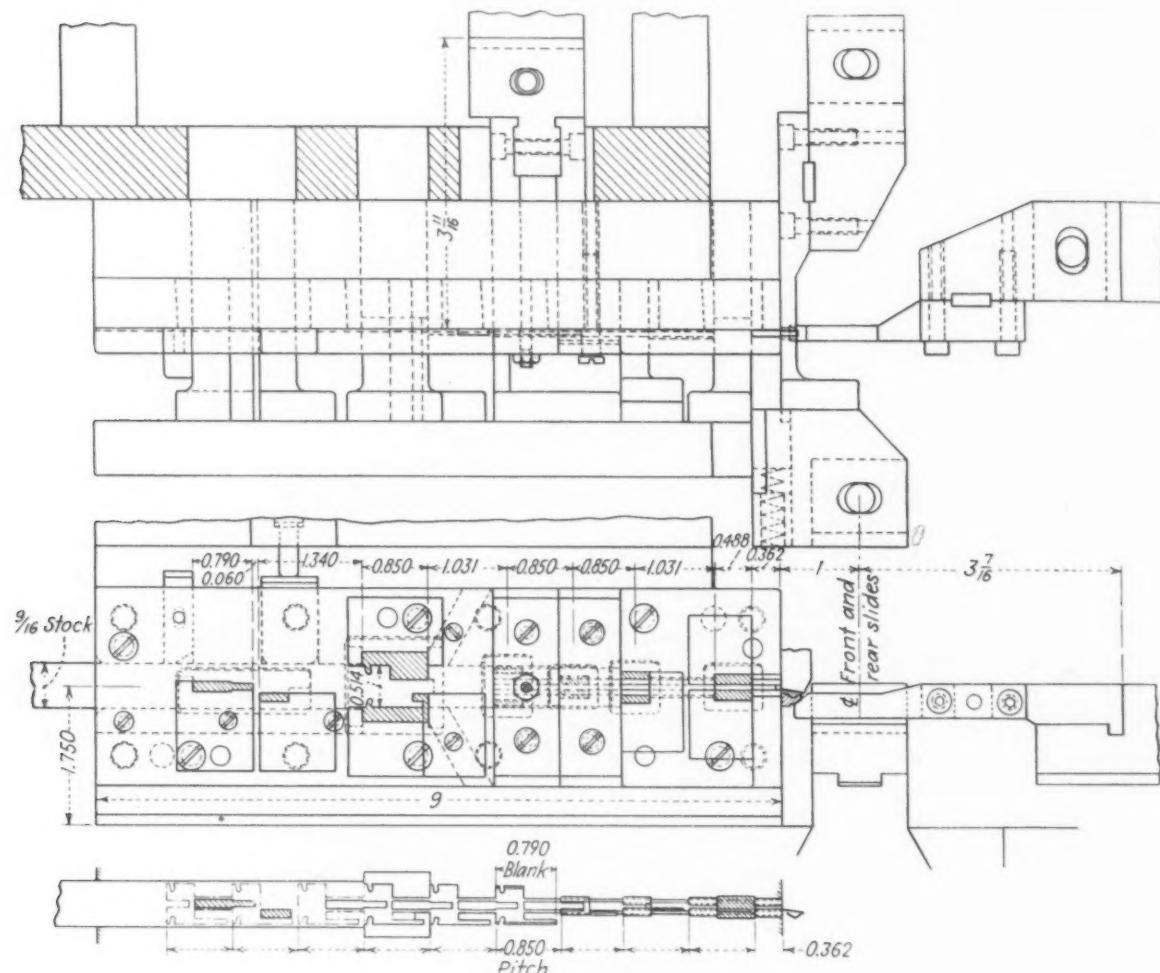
Assembly drawing of the die that produces the double-barreled stamping shown in fig. 10, having a projecting hook-shaped spring portion.
